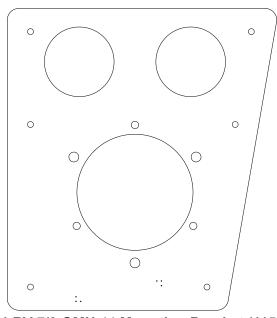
RV-7/9 GMU 44 Mounting Bracket (115-01027-00)
